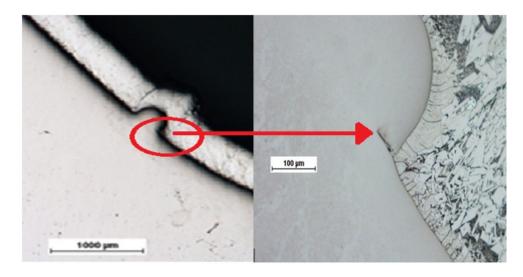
Specimen No. 10, notch close to weld toe, crack initiation area.
